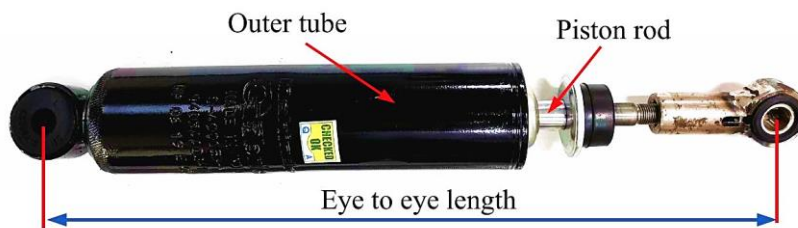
Passive damper of front suspension of SUV (Make: Gabriel)
